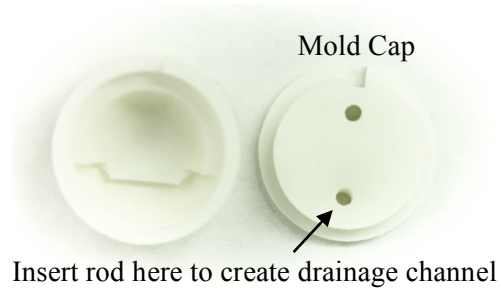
Eye mold depicting the opening of the drainage channel.
